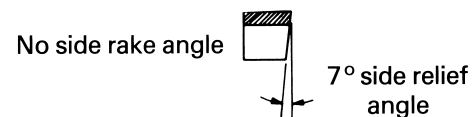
Tool angles for machining cemented carbide coatings. Source: Adapted from Ref 1
